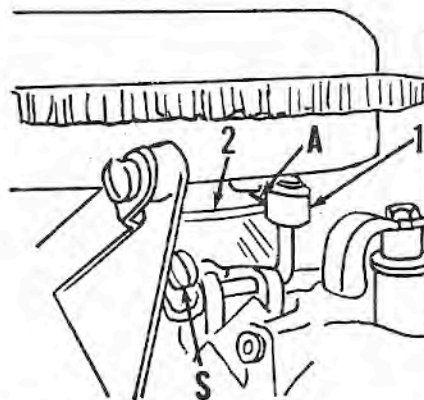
Schematic view of throttle linkage showing adjustments. Refer to text.
